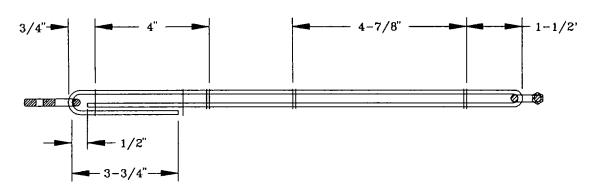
(Container Front Mounted) Kit, Bag Assembly (Sheet 2 of 2)
